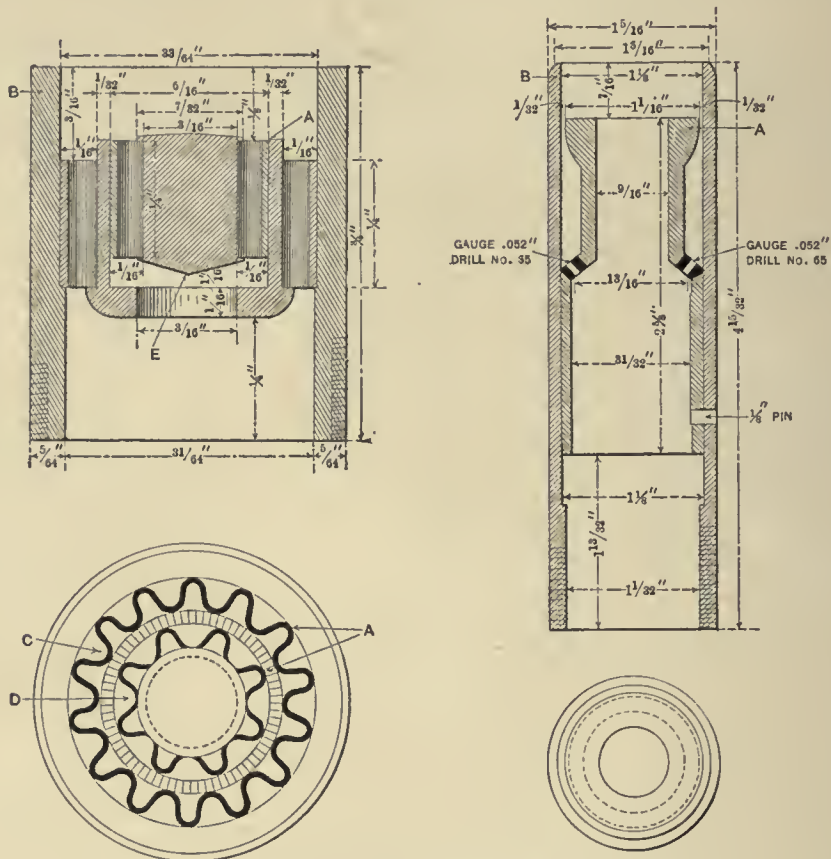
The Ferrofix Brazing Head and Machlet Burner Tip.
